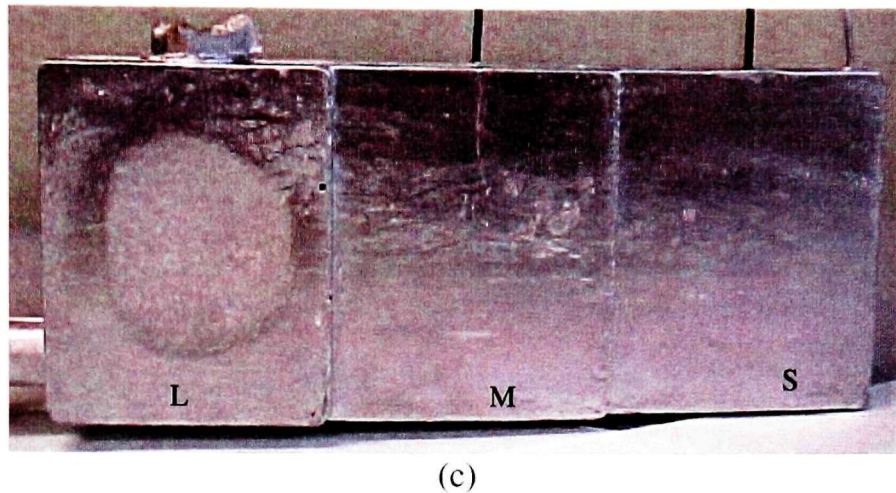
Effect of directional solidification by heat pipe cooling on the shrinkage distribution in the casting: (a) with no heat pipe cooling, (b) Section S cooled by the heat pipe, (c) Sections S and M cooled by the heat pipes
